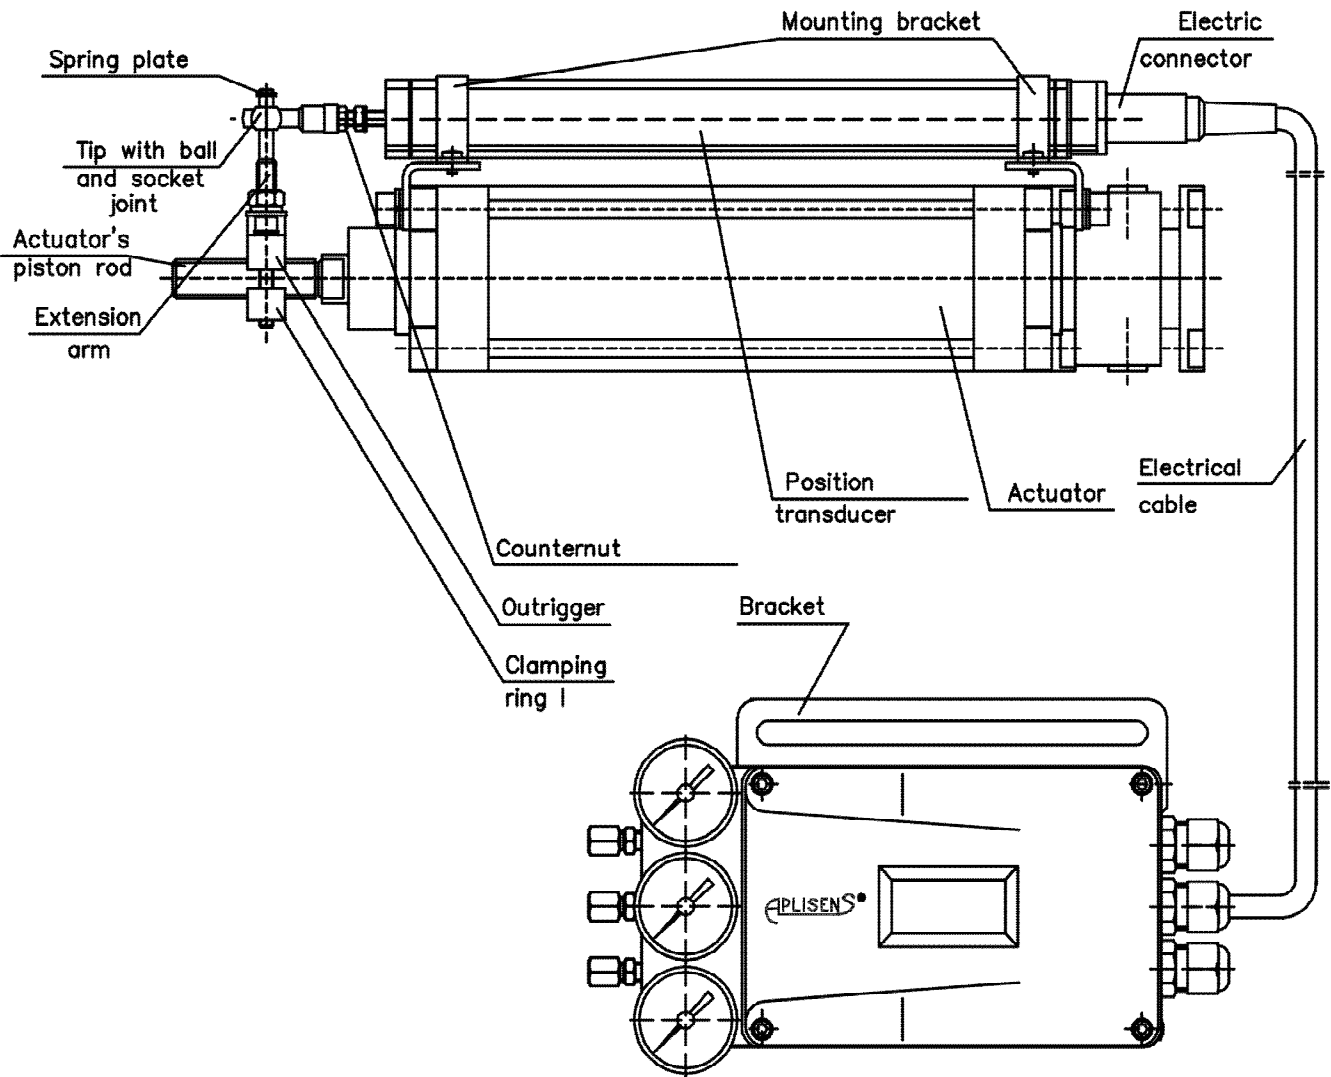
Positioner type APIS-1X0-... with mounting kit APIS-A0003-SS(SO) (positioner mounted on actuator with control valve – in accordance with PN-EN 60534-6-1:2001 e.g. on actuator from Samson or Arca Regler company)
